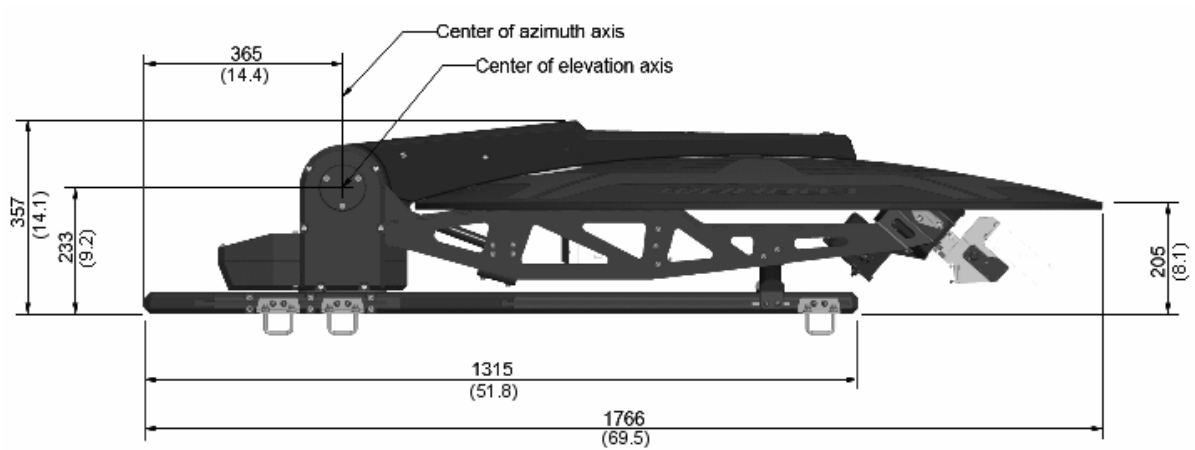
EXPLORER 8120 antenna: Side view (stowed)
